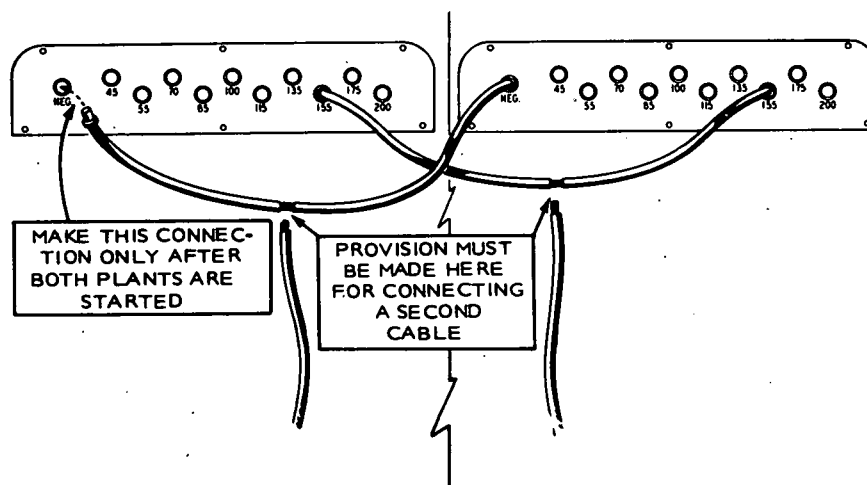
WIRING CONNECTIONS FOR WELDING IN PARALLEL
